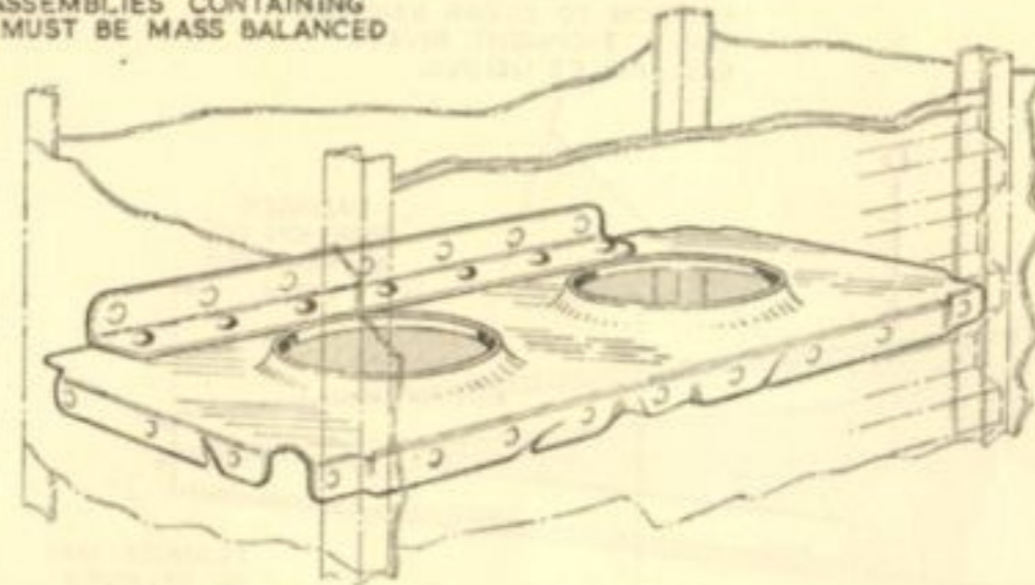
Fig. IIB. Method of repairing cracked flanges in lightning holes
